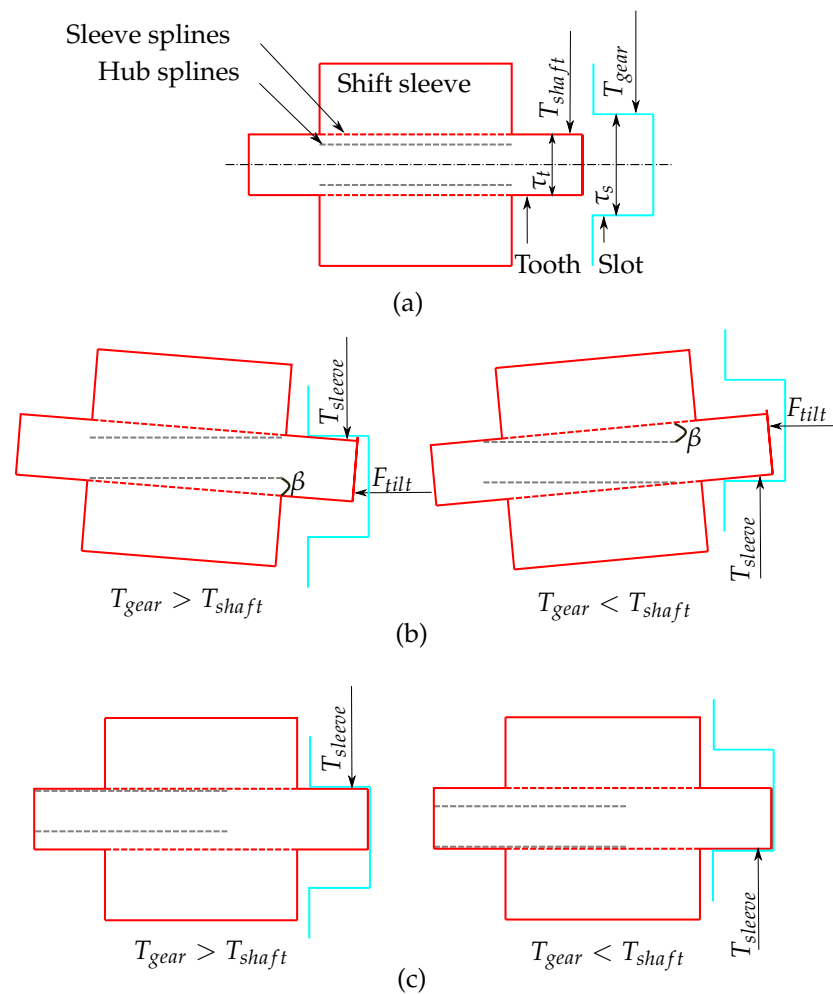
Torque and tilting force on the shift sleeve depending on the sleeve state: (a) disengaged; (b) partially engaged; (c) full engagement. The red part is the shift sleeve, the blue part is the complementary ring.
